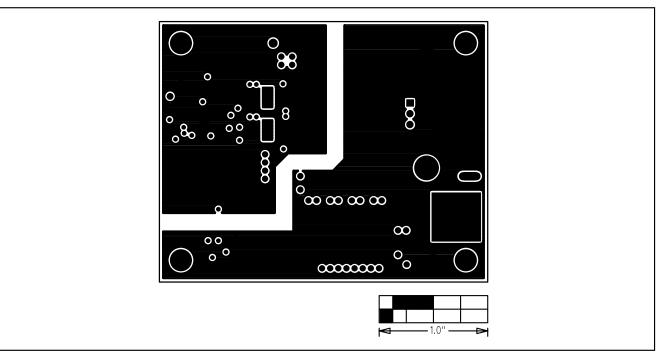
MAX5069A EV Kit PC Board Layout—Inner Layer, GND Plane
